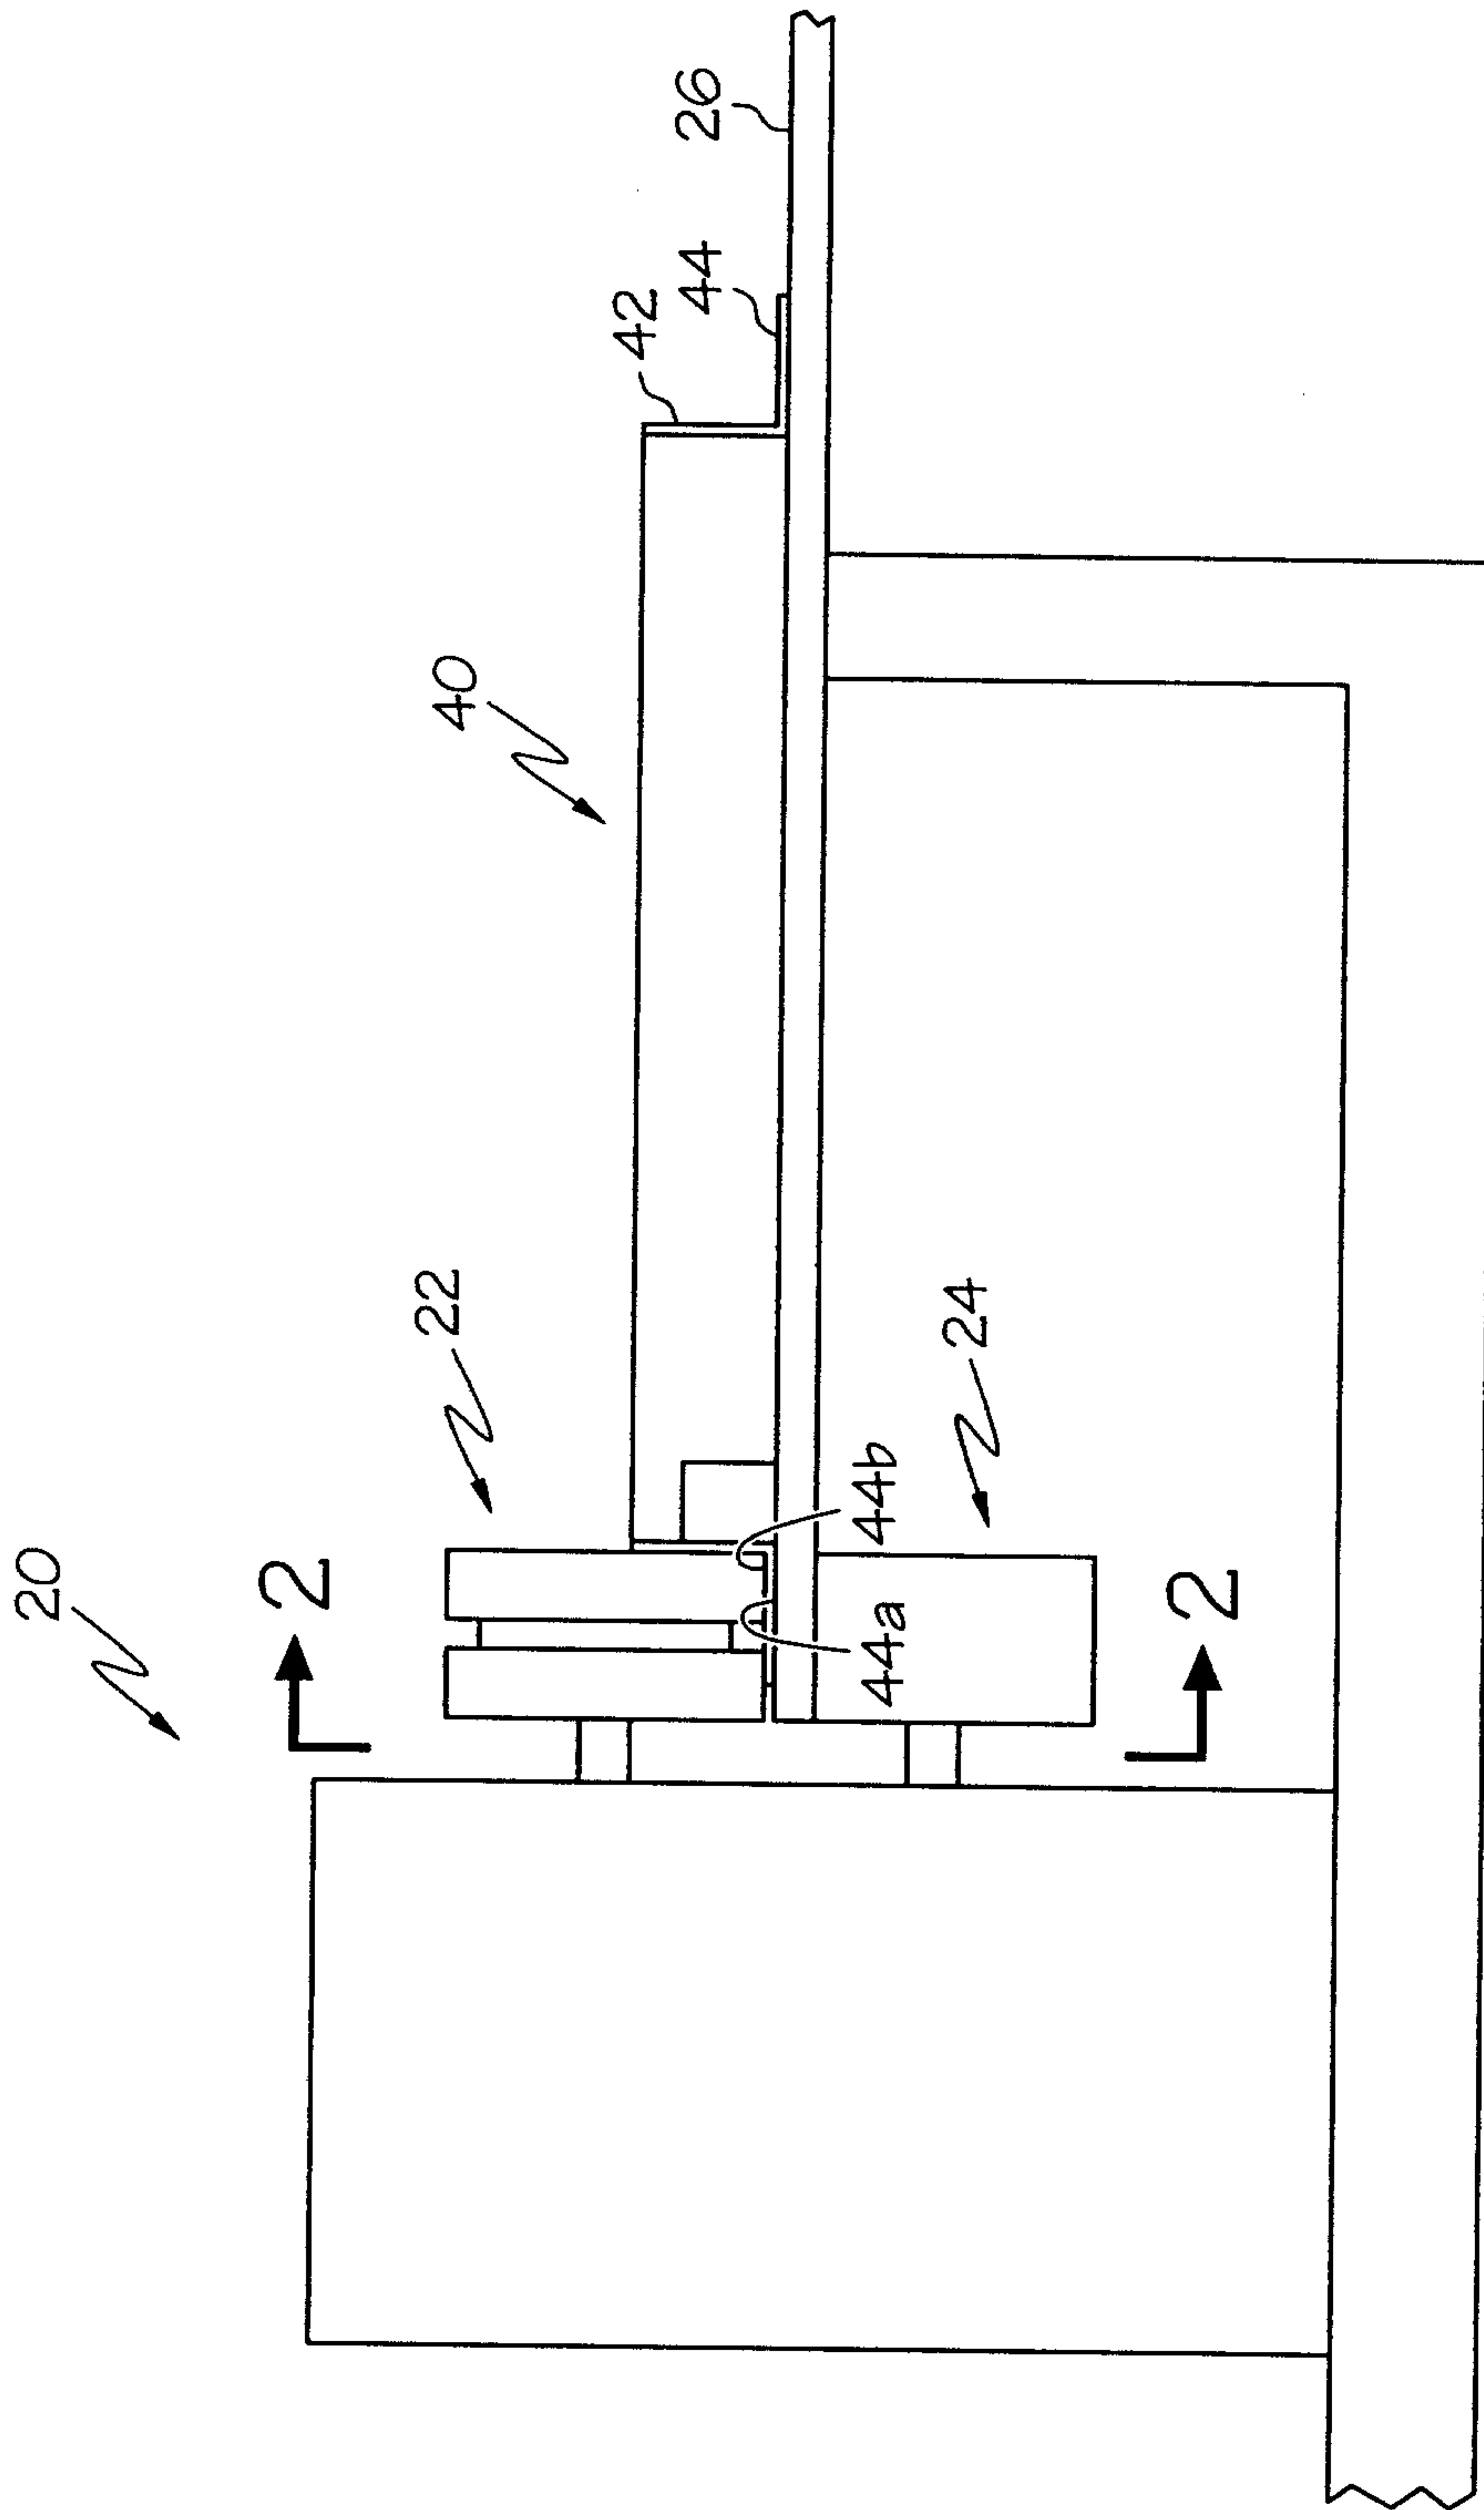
is a front elevational view of a device for forming a flanged ring in accordance with one exemplary embodiment of the present invention;
